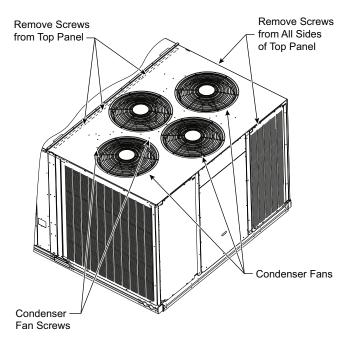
Location of Top Panel Screws and Coil Corner Post
